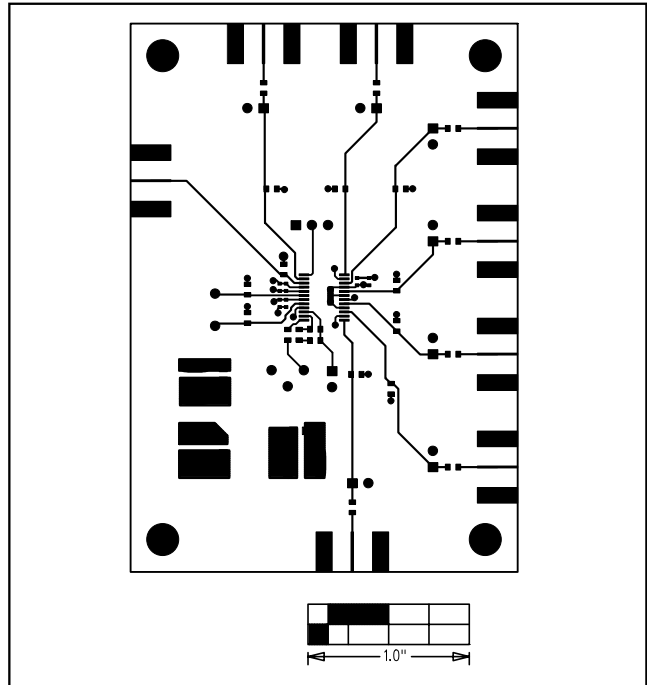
MAX9486 EV Kit PC Board Layout—Component Side
